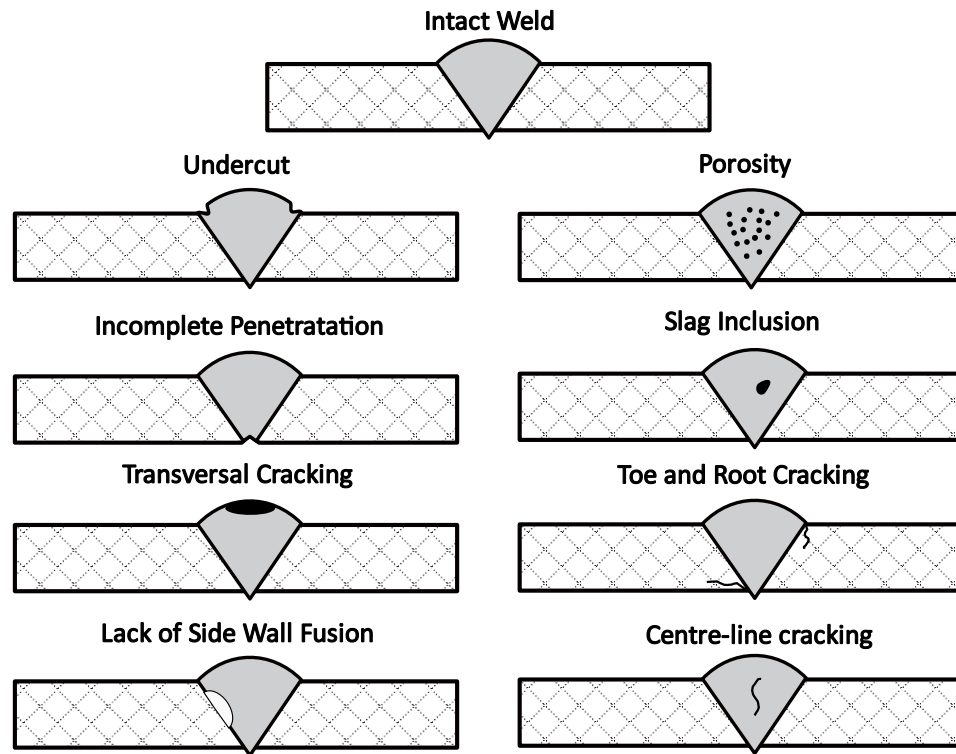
Common defects associated with GTAW showing undercut, porosity, incomplete penetration, slag inclusion, transversal cracking, toe and root cracking, lack of side wall fusion and centre-line cracking
